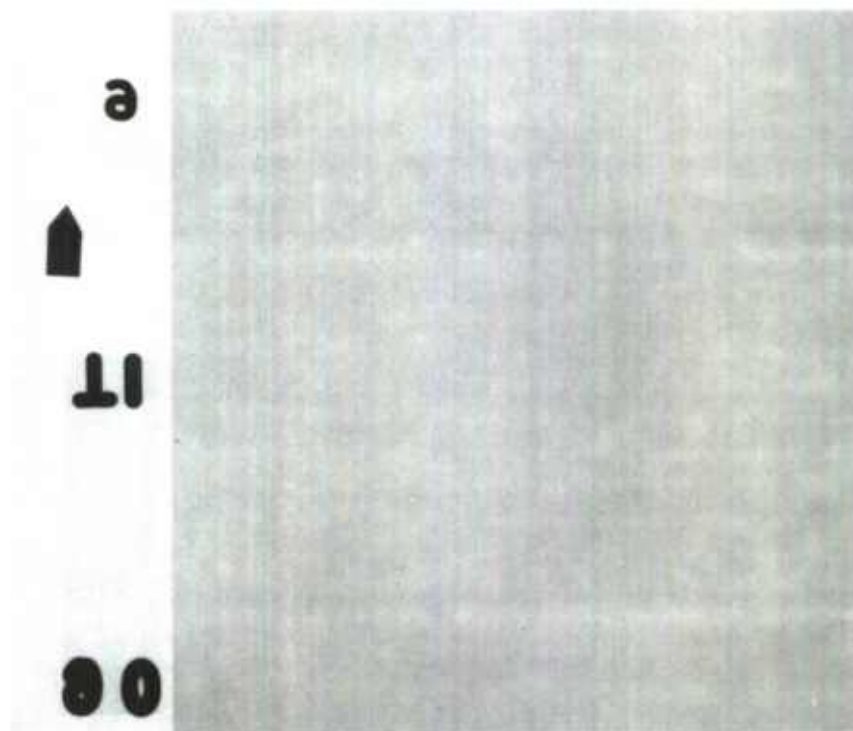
Radiograph of Complex Welded Fatigue Specimen
